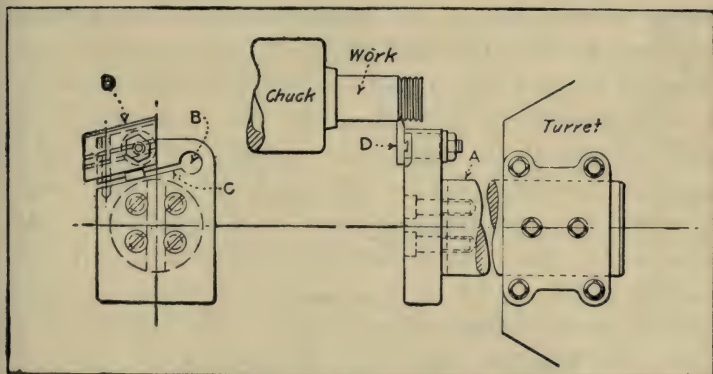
A GOOSE-NECK THREADING TOOL FOR TURRET LATHE
